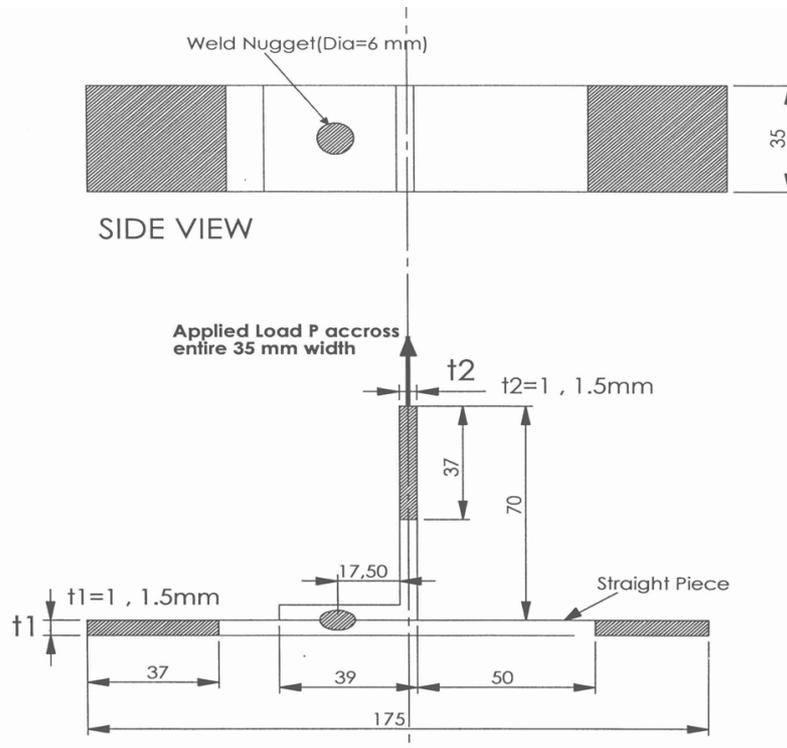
Geometry and dimensions of spot weld specimens
